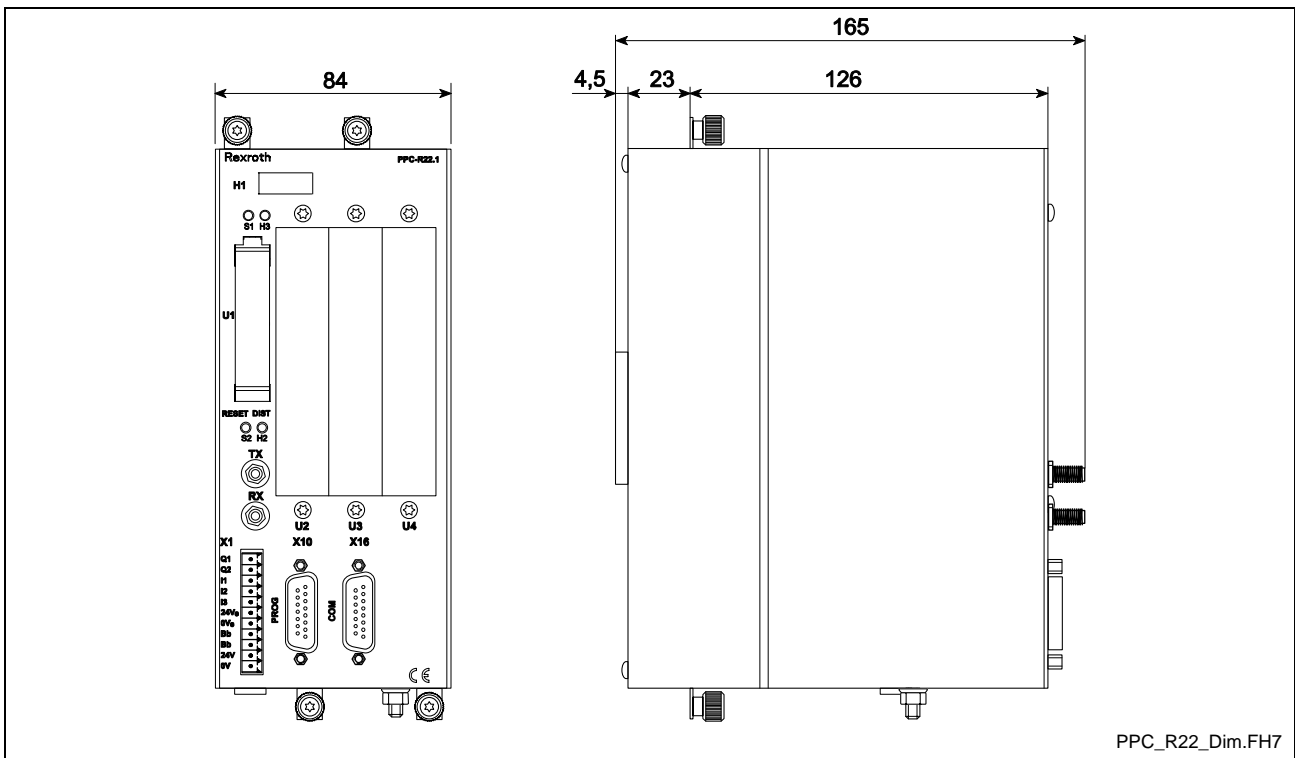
PPC-R22.1 Dimensions [mm]
